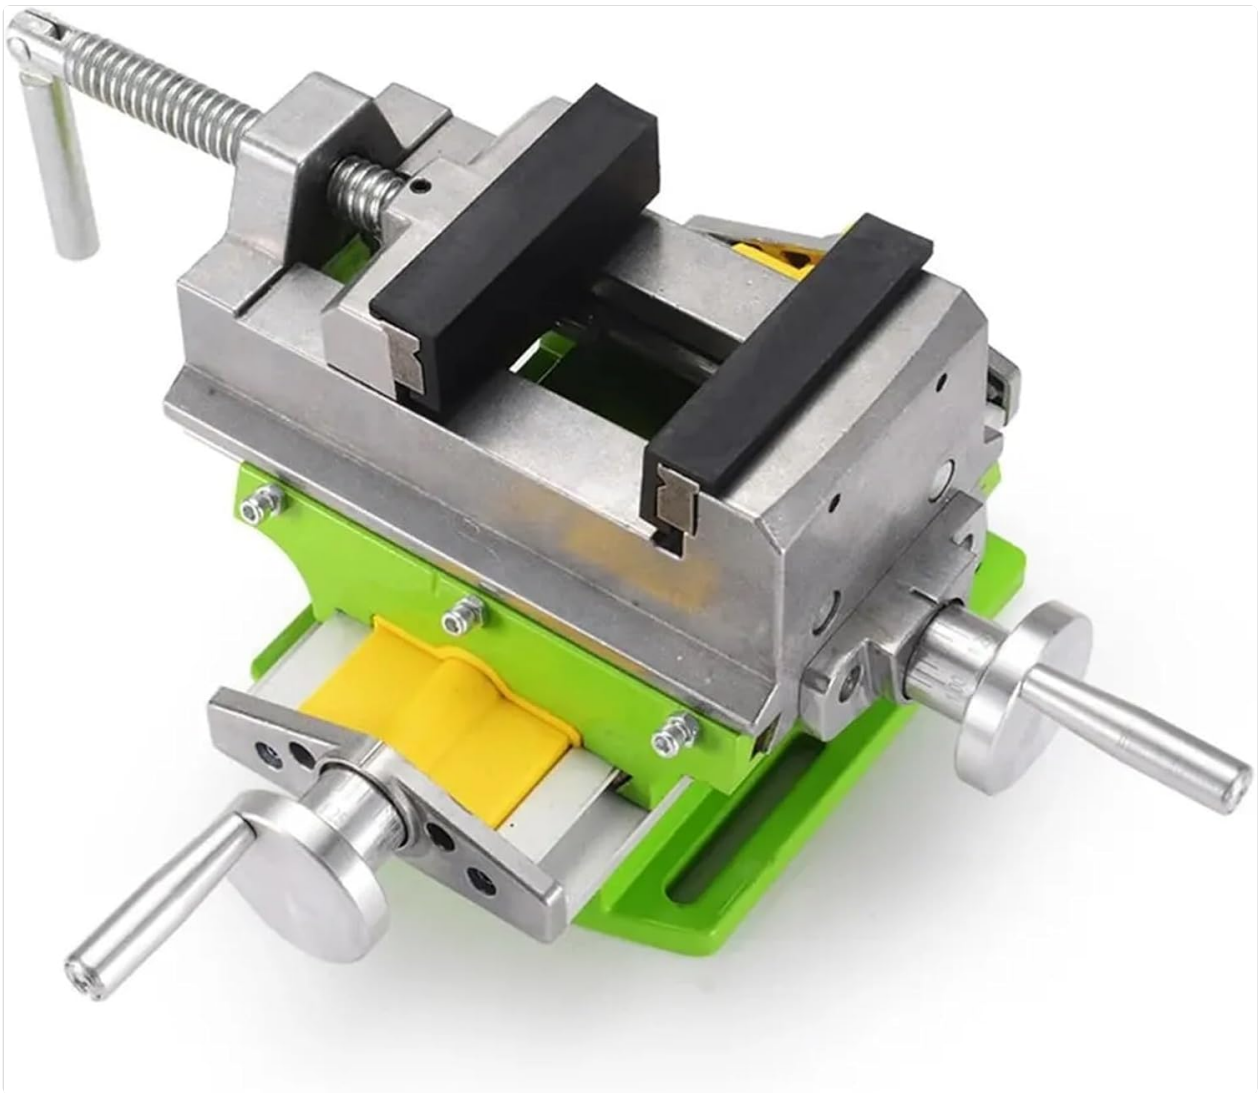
Top view showing the vise jaws and sliding mechanisms.
